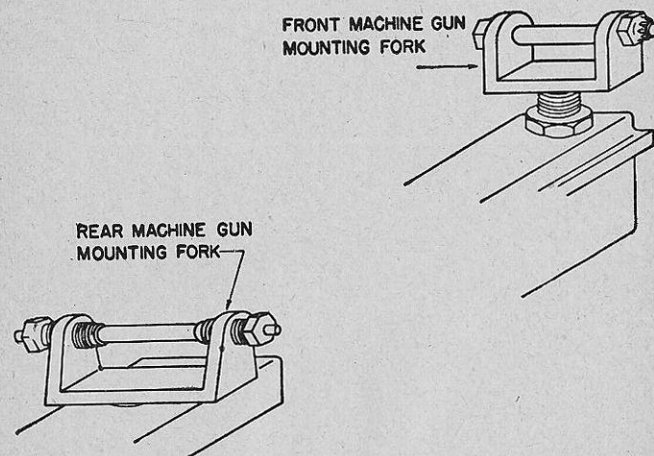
Mounting forks for caliber .50 machine guns.
